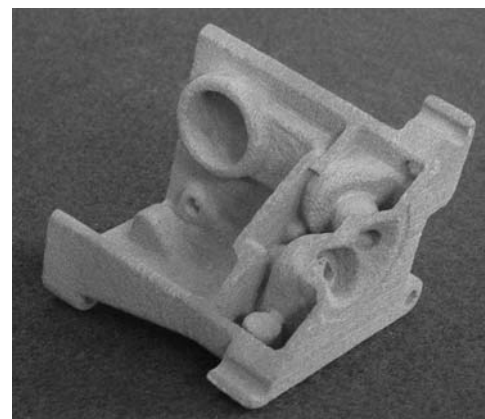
Detail of the sectioned half head prototype showing the swirl inducing inlet
